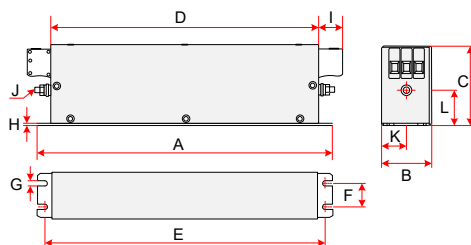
Dimensions of Schaffner FN 3258 series filter of 7 A to 55 A
